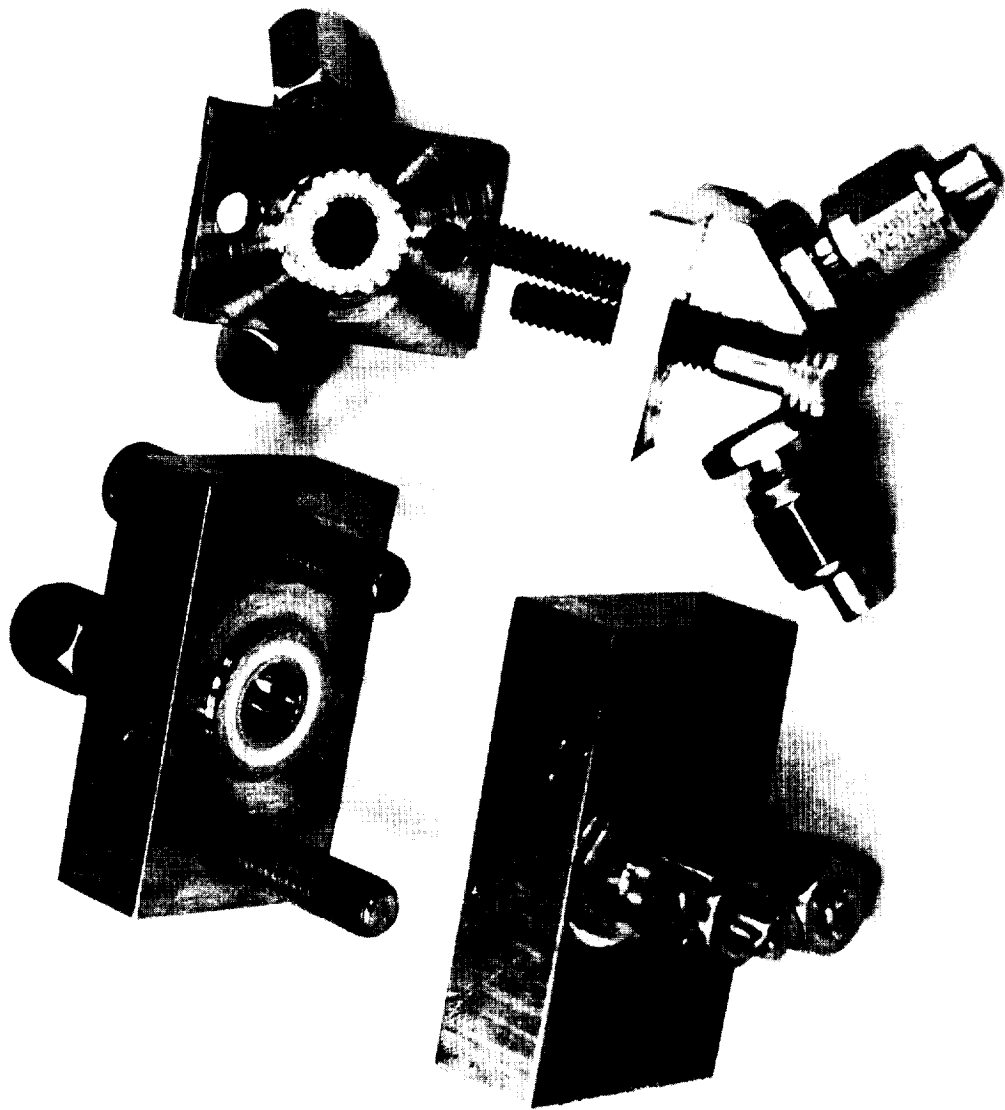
SPECIMEN MOUNTING PRESSURE CUPS
